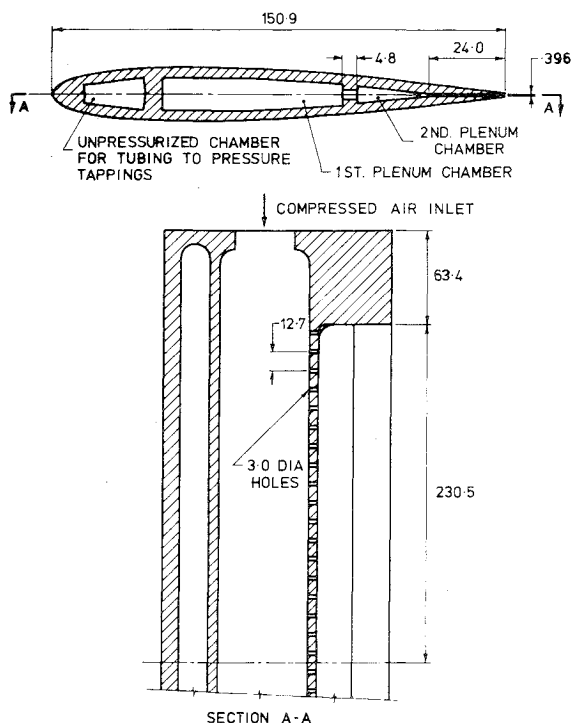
Details of the test airfoil (dimensions in millimeters).
